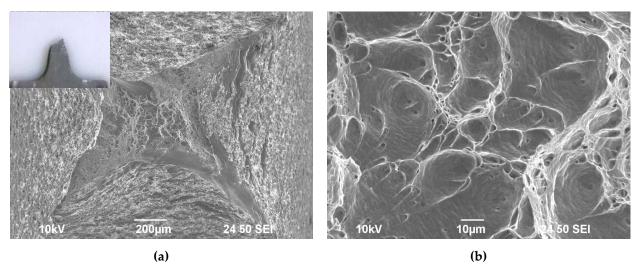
SEM images of fracture surfaces in specimen No. 5 after tensile tests at room temperature. Figure 3a offers a general view of the fracture while Figure 3b shows an enlarged image of the central part of the fracture.
